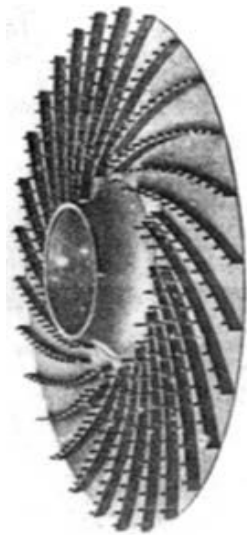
Impeller opened up to show milled rivets (BBC).
